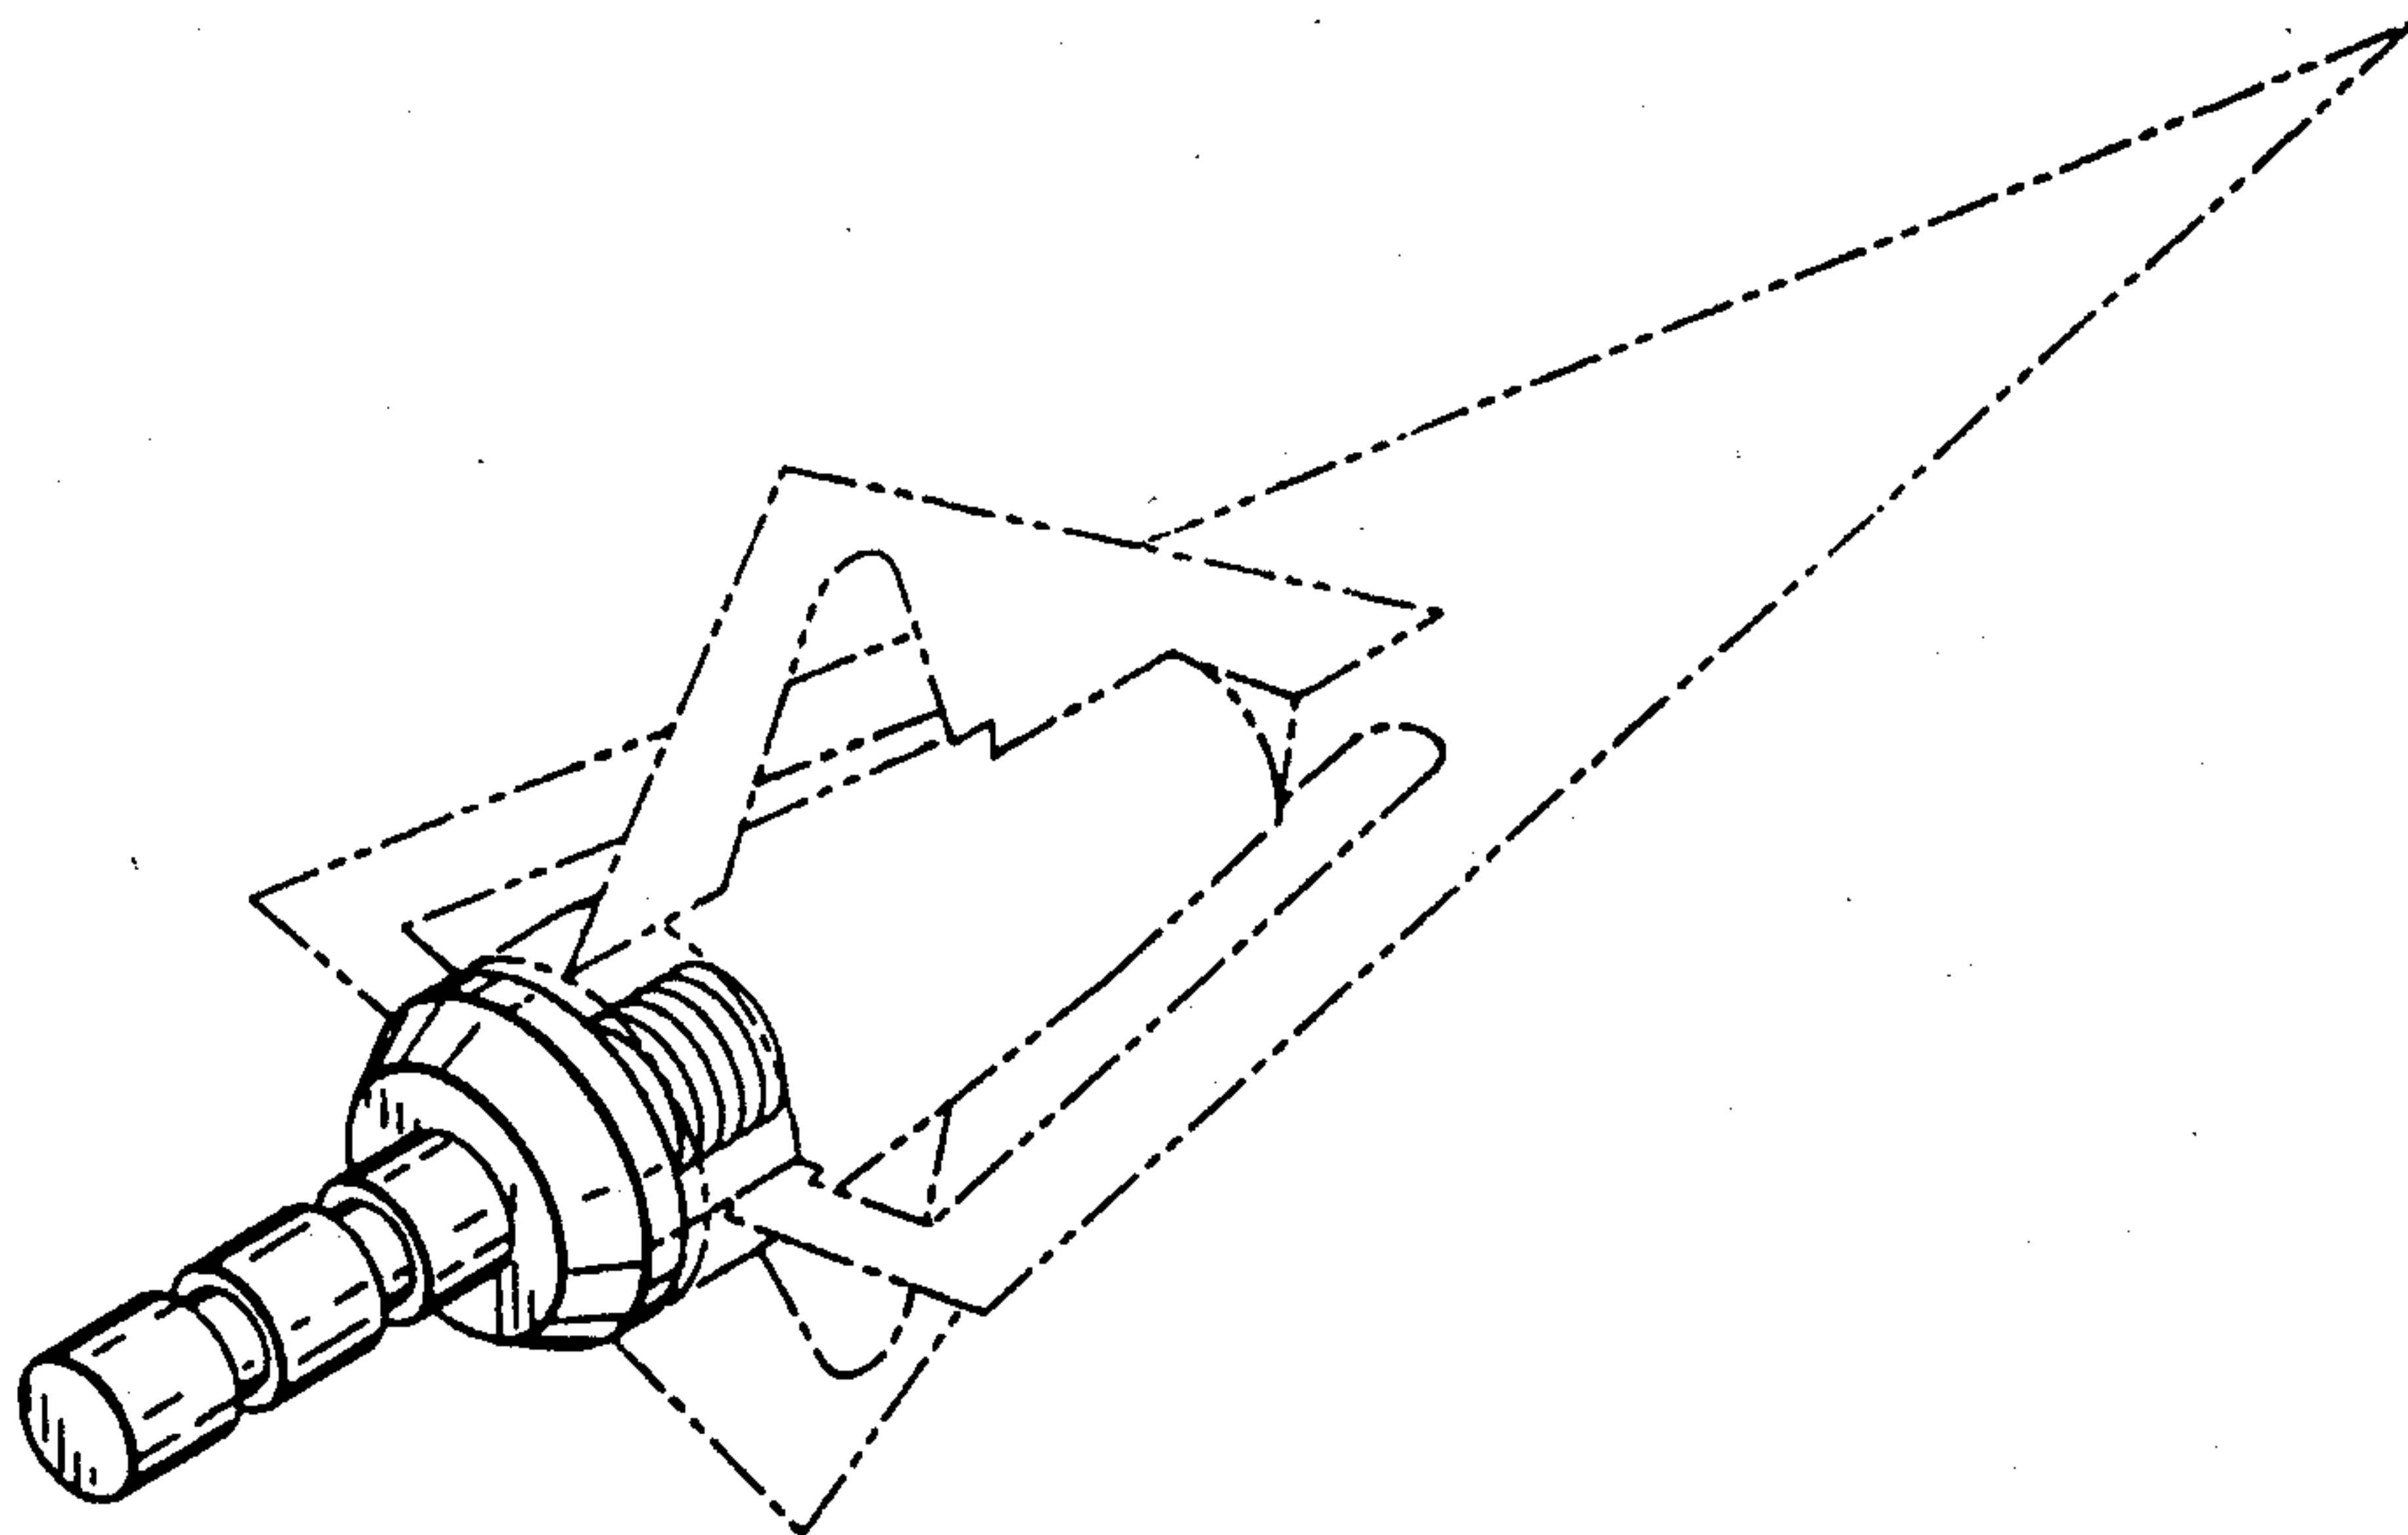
is a right-rear perspective view of a broadhead connector for carbon-shaft bow arrows showing my new design, a left-rear perspective view being a mirror image;
